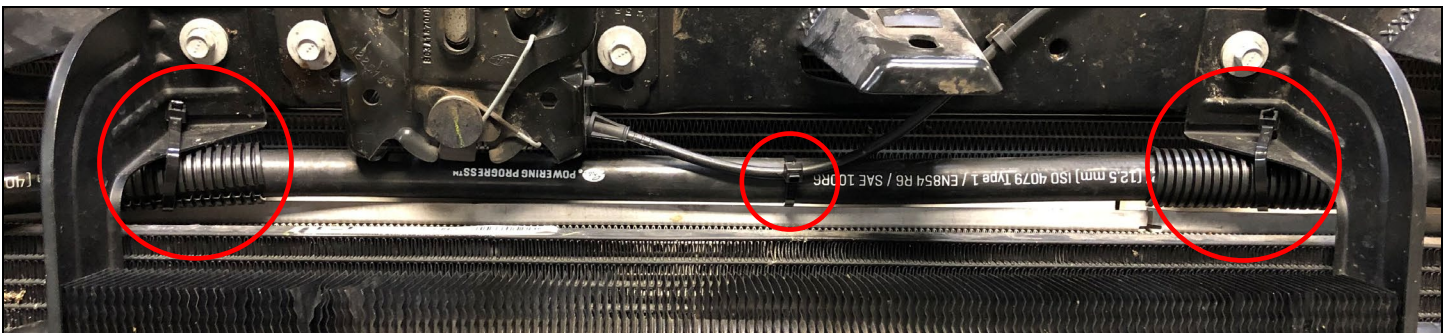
Protective Loom and Cable Ties Securing Passenger Side Hose
